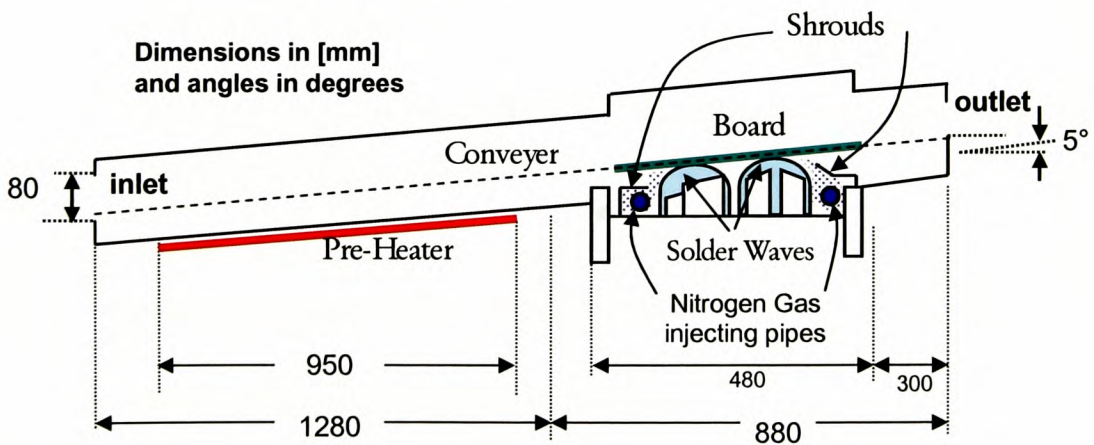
Schematic of Wave Soldering Machine and Some Important Dimensions
